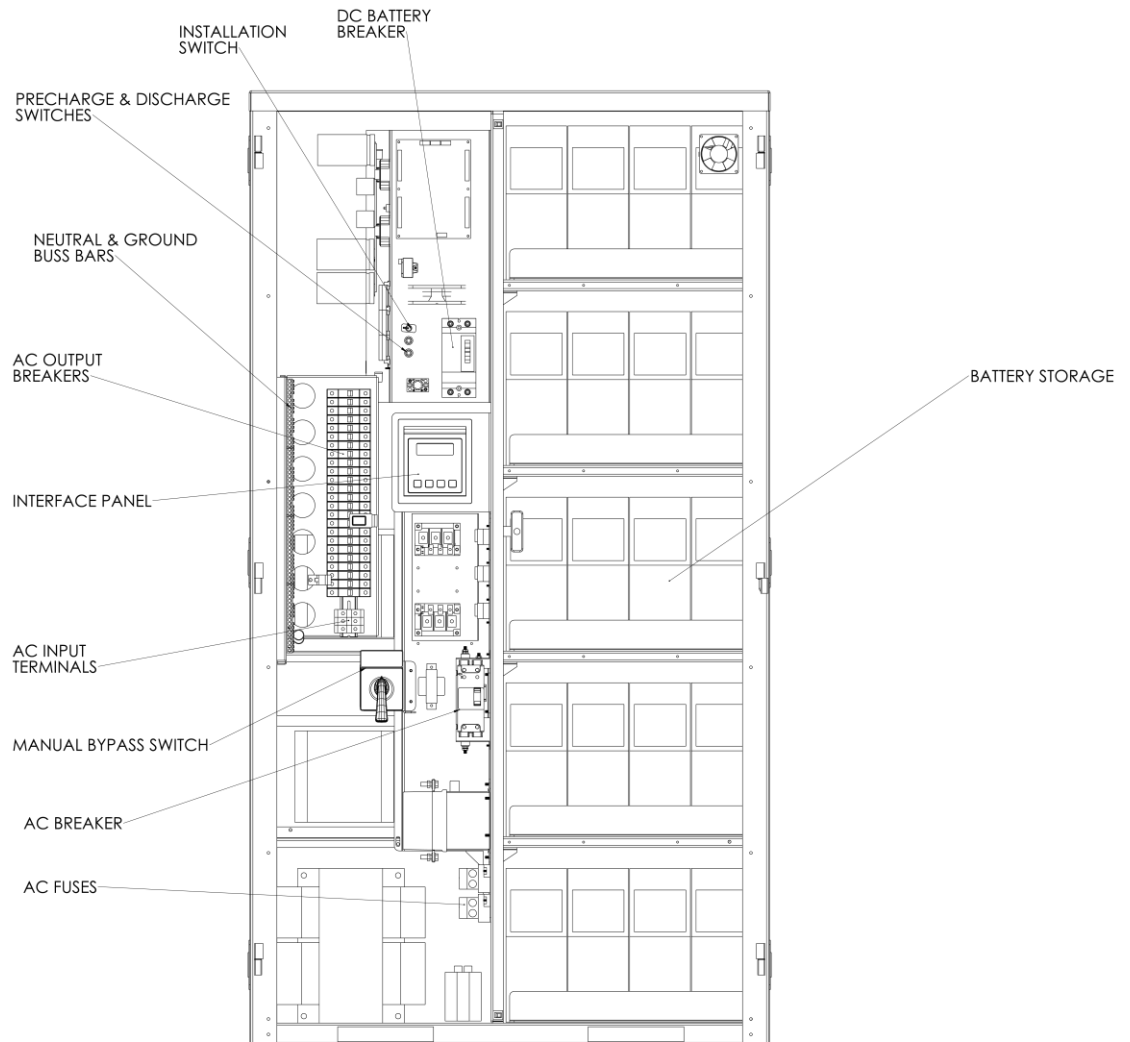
AC Connections for 10 kW – 16.7 kW systems
